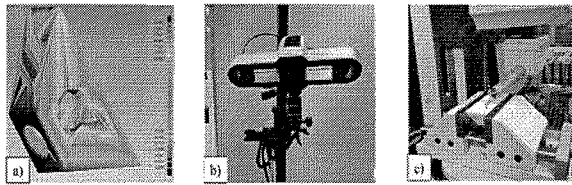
Part test a) part accuracy test between CAD model and printed part for FDM, b) 3D scanner to obtain the printed part's geometry c) surface quality test on the Formtracer
